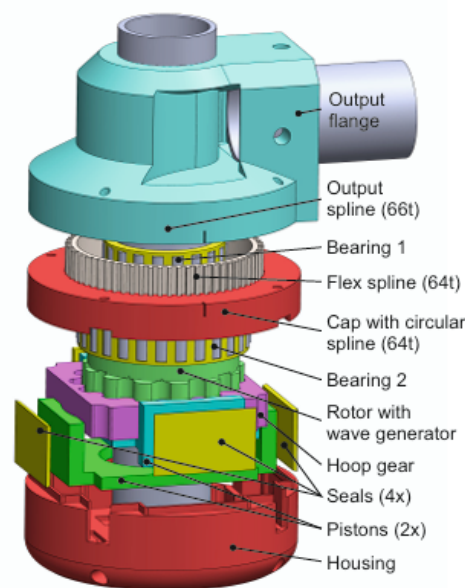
Exploded view of one of the variants of pneumatic motors used in MAMRI, featuring a harmonic drive.
